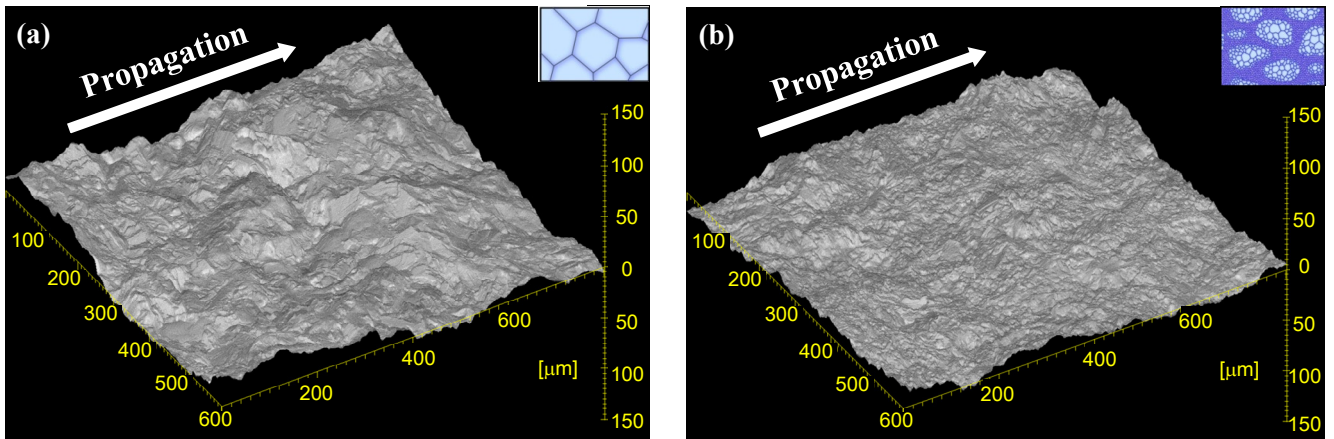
Axonometric drawing of fracture surfaces of the (a) IP and (b) Harmonic series ( $R = 0.1$ ).
